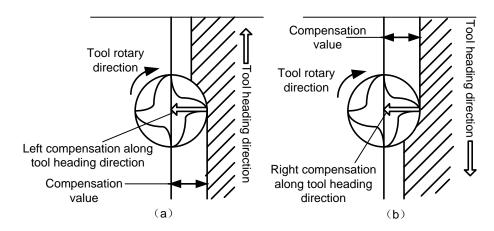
Direction of tool compensation (a: left compensation b: right compensation) Programming for tool radius compensation is as shown in Fig. 3-41:
